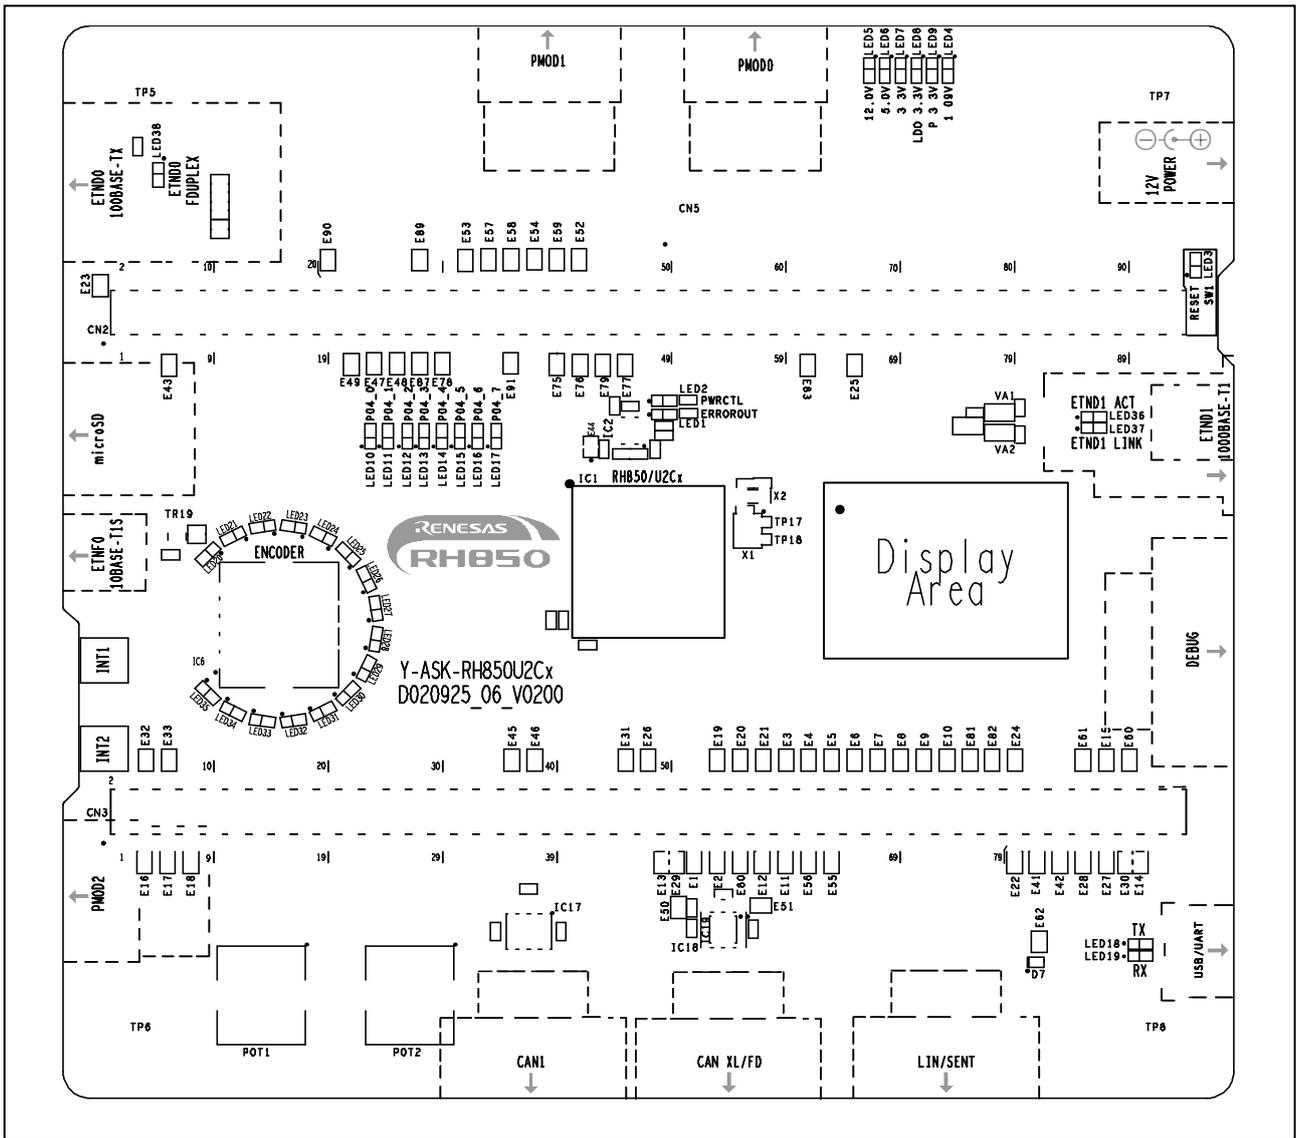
Placement of connectors and LEDs on top side of the starter for board version D020925_06_V0200
